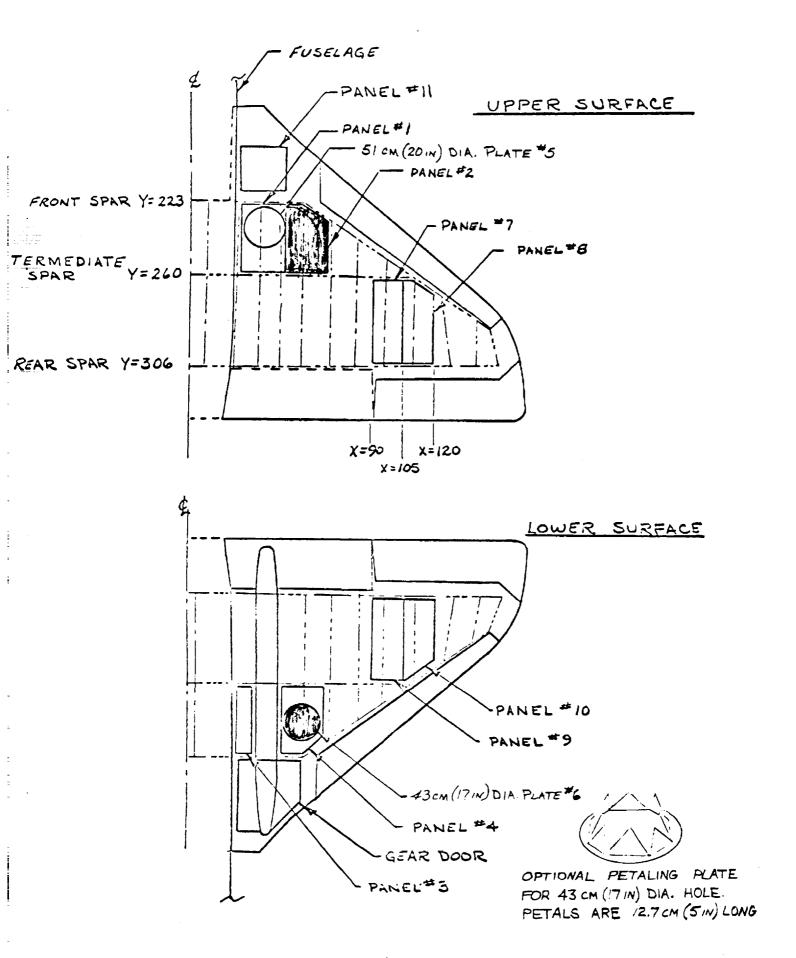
HOLE CONFIGURATION #5. PANEL 2 AND PLATE 6 REMOVED
